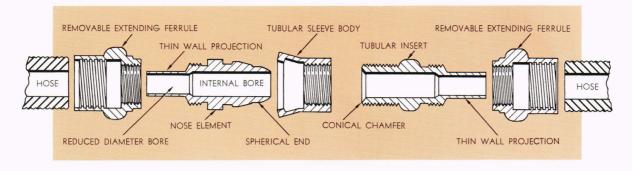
Longitudinal section of the coupling components in an exploded condition.
